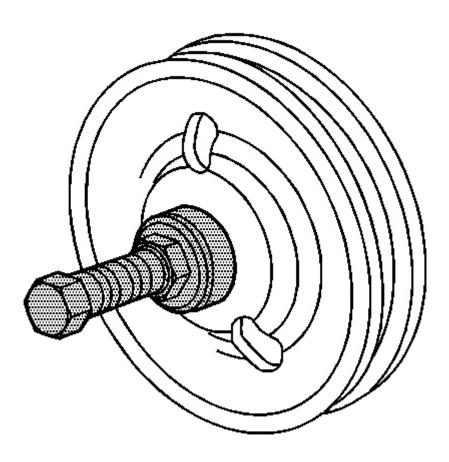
View Of Power Steering Pump Pulley Installer Courtesy of GENERAL MOTORS CORP.
